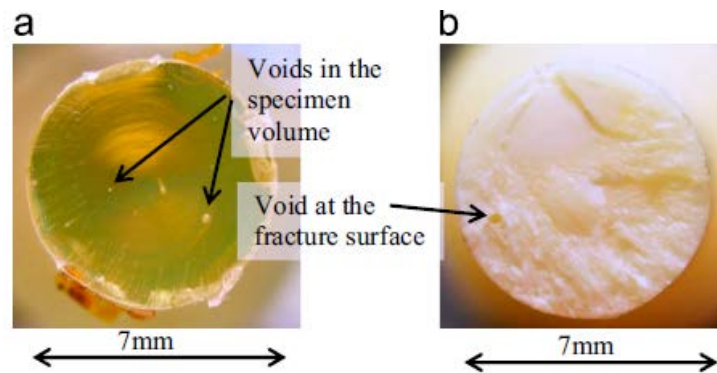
Fracture surfaces of D609 (a) and E20HP (b) tensile specimens.
